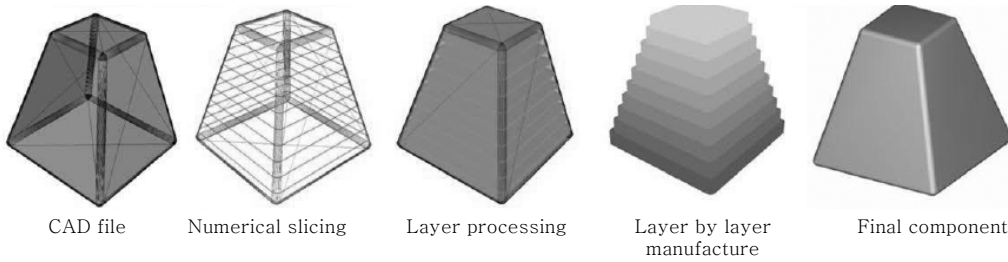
Tool path generation from CAD file and layer processing²⁾
